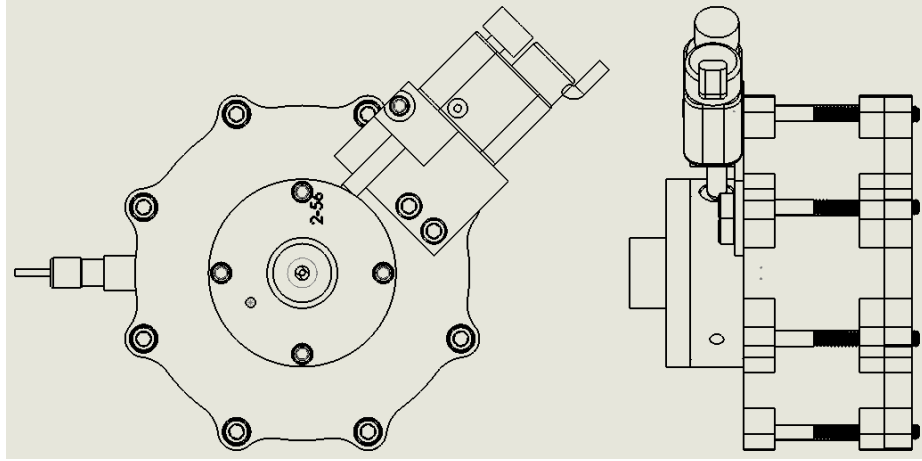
Schematic of high pressure cell assembly. (Move this figure to the laser ablation part)
